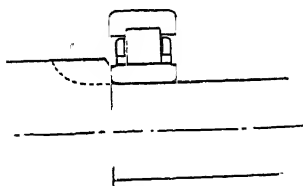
Slots milled in a shaft shoulder to enable an inner race to be withdrawn.
